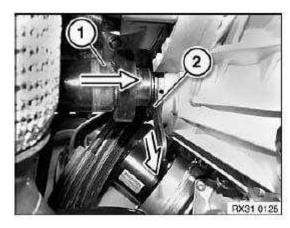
Identifying Output Shaft And Guard Courtesy of BMW OF NORTH AMERICA, INC.
